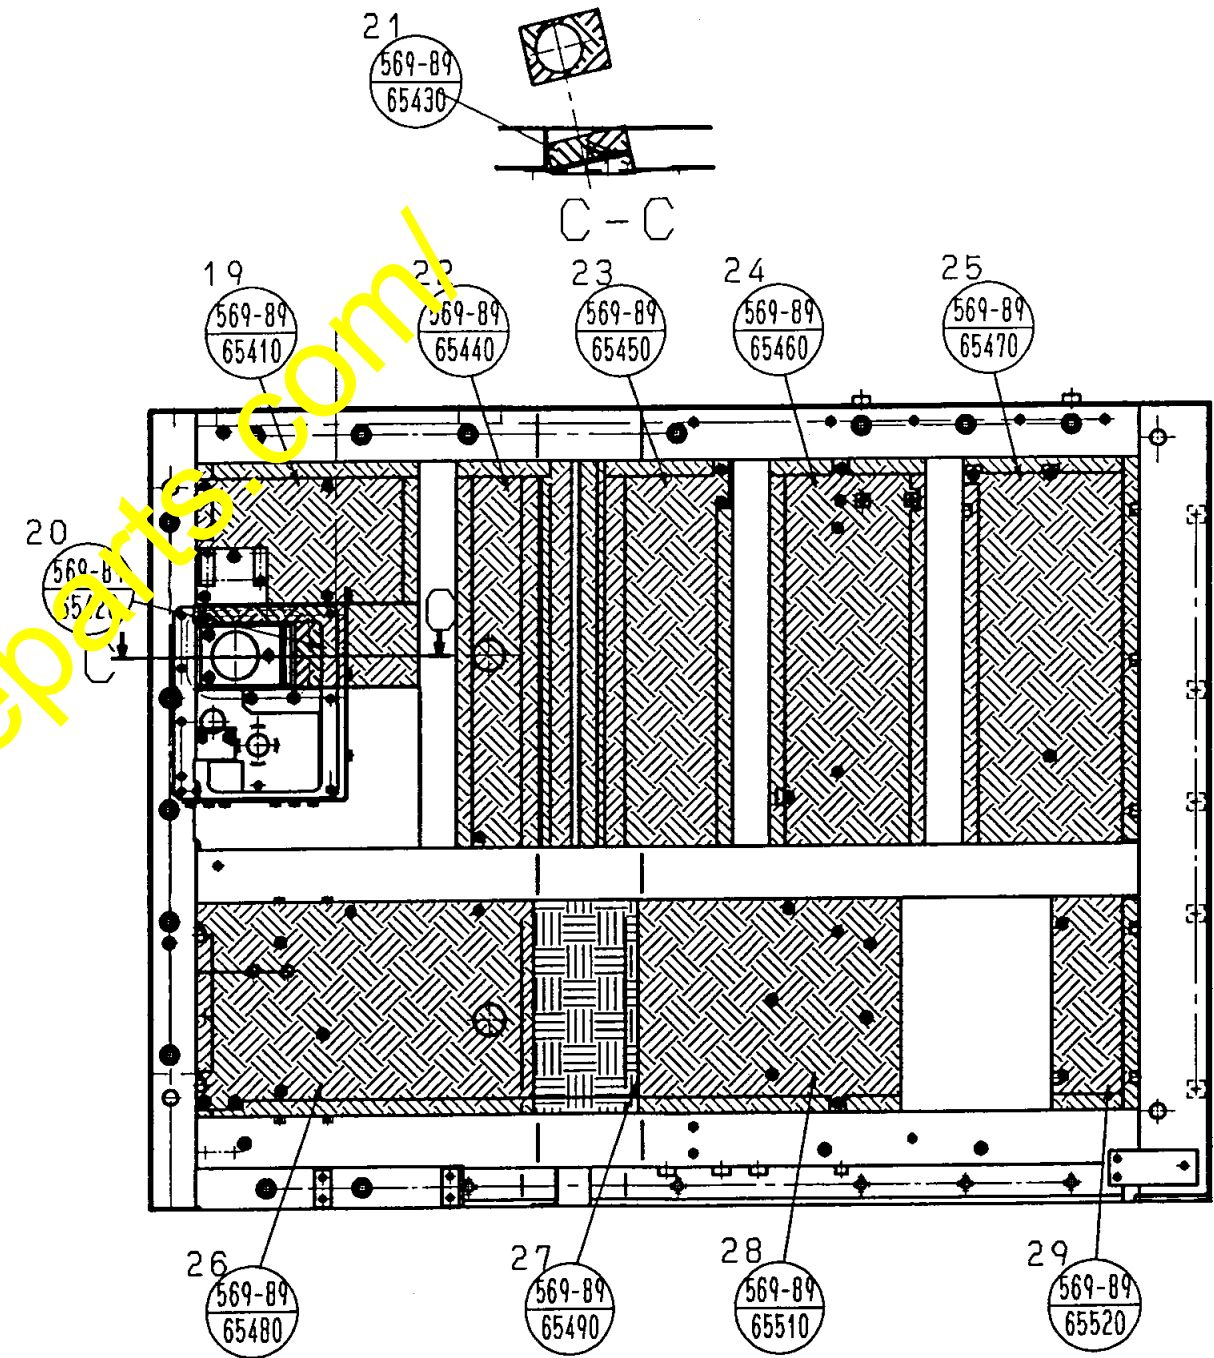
(Drawing for installation of the sheets: The above drawing is a bottom view, when looked up from underneath.)
